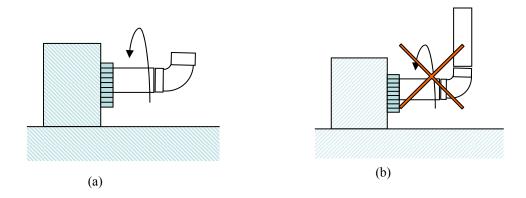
Example of roll welding constraint: (a) Roll welding is feasible; (b) Roll welding is not feasible (adopted from Sadeghi and Fayek (2008))
